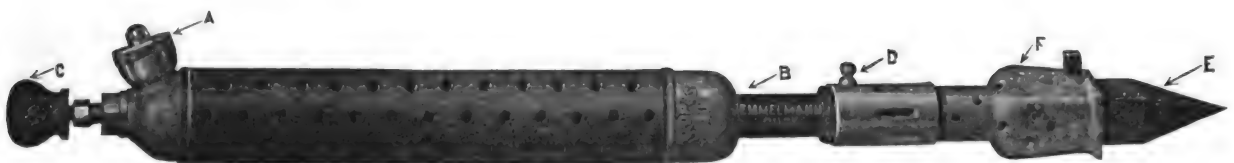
GASOLINE SOLDERING IRON AND BLOW TORCH.
